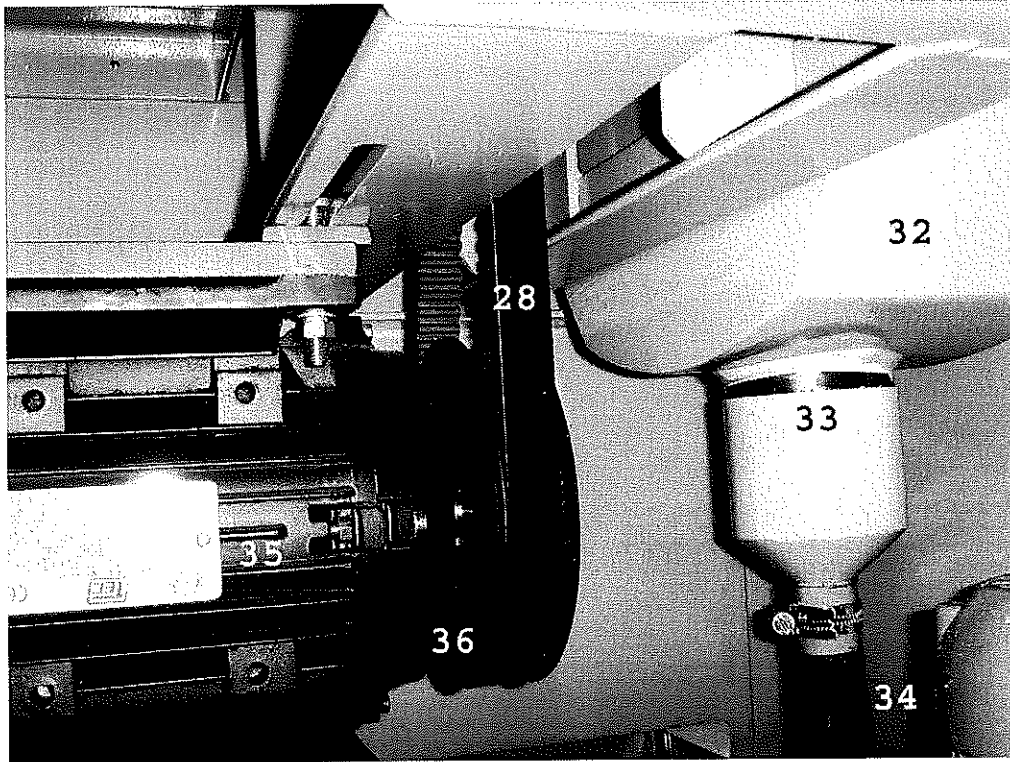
Cutting wheel sump #32 and #33 with drain tube #34 to coolant tank
